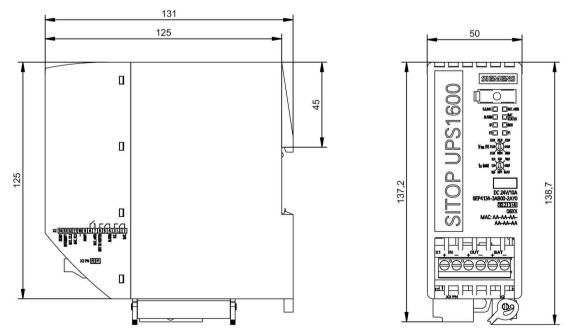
Dimension drawing 6EP4134-3AB00-2AY0, 6EP4136-3AB00-2AY0
